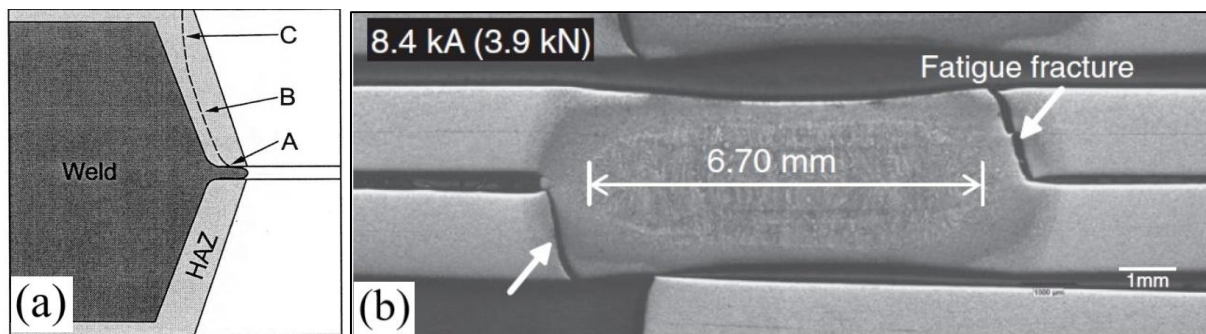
(a) Schematic of the fatigue fracture in HSS RSW [90], (b) Fatigue fracture [22].
